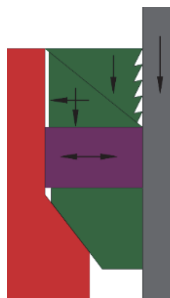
DETAILS OF THE CASING HANGER (SLIPS AND SEALS)
